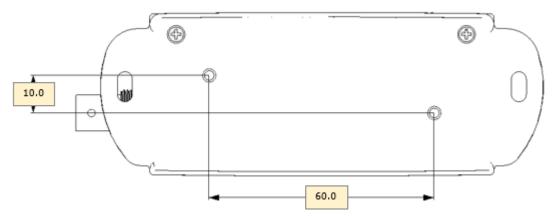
LDSBus ORP Sensor Adapter Dimension - Bottom View
